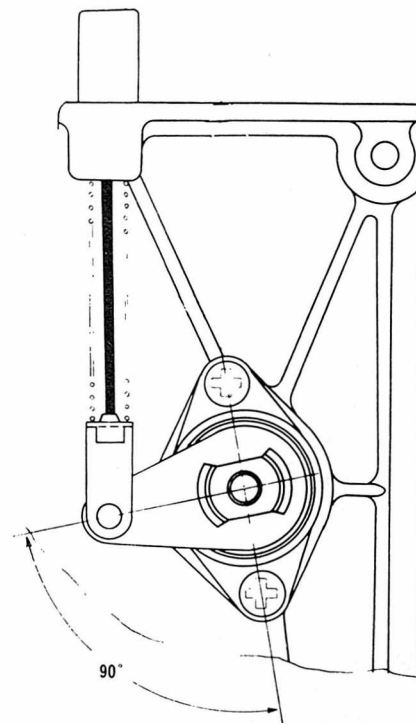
View of clutch release arm with cable adjusted correctly.
